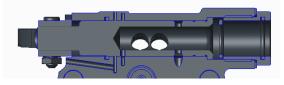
Drawing of New Cooling and Flushing Mechanism.
